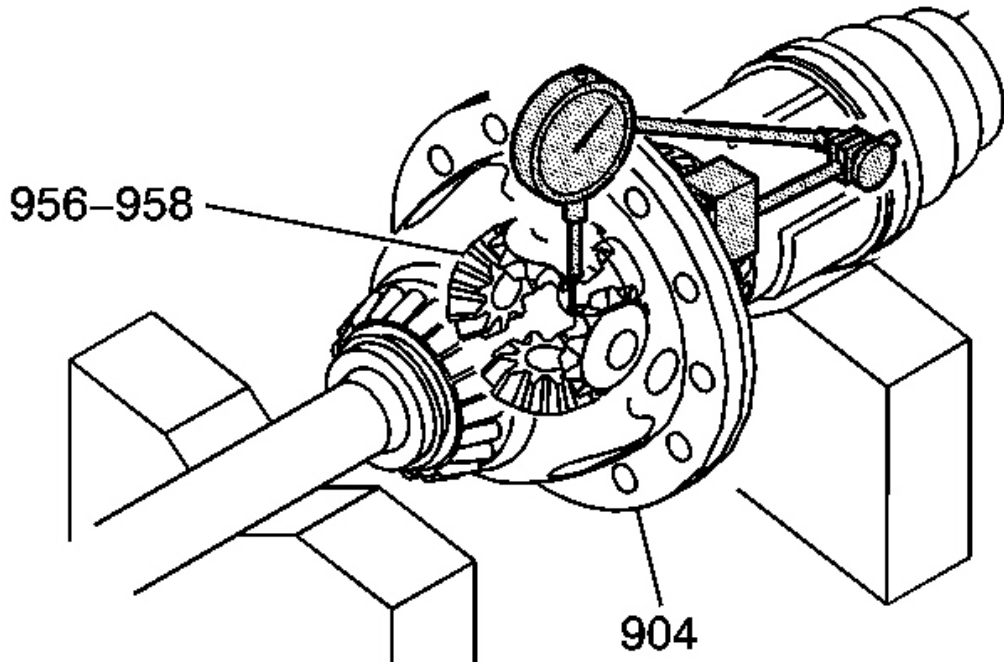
Measuring The Backlash Of Pinion Gears Using SA9179NE
